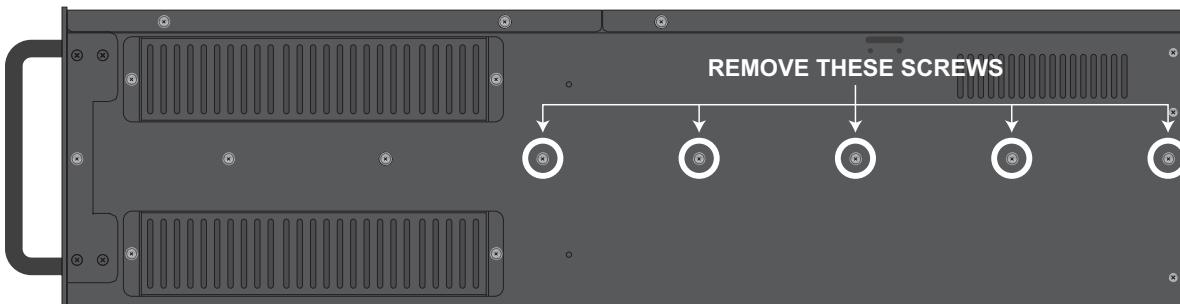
Removing the Mounting Rail Attaching Screws from the Chassis
